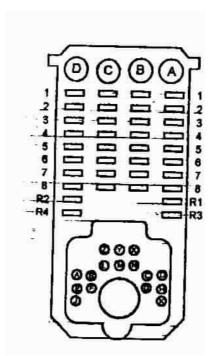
FRONT VIEW OF PLUG BOARD
